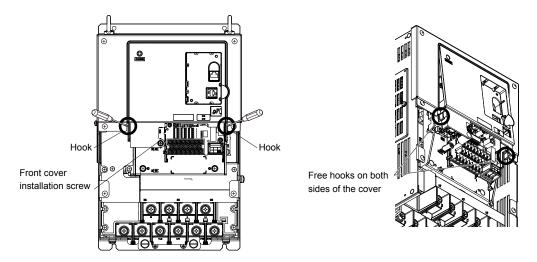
Remove the Front Cover (2A0010 to 2A0415 and 4A0058 to 4A1200)
